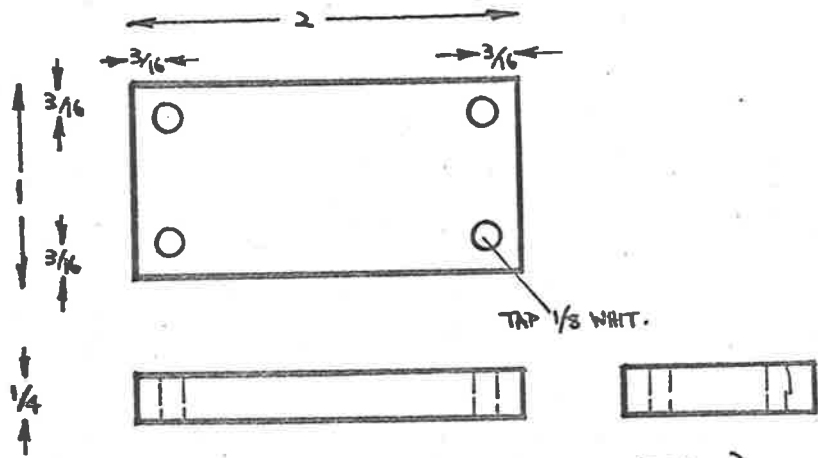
BOTTOM VALVE PLATE (BRASS)
